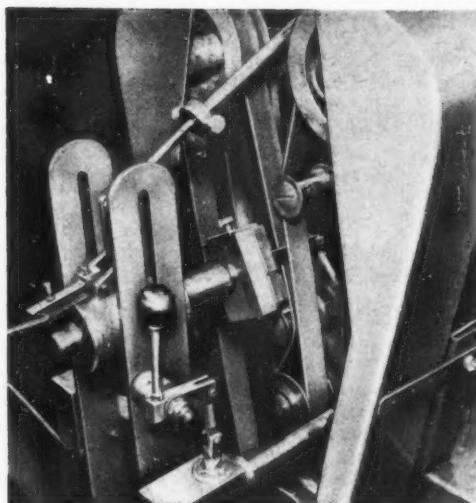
Close-up View of the Morris-Bristol Machine with the Blade, in its Holder, in Position Between the Belt Surfaces. The Blade is Rotated and Moved Horizontally for the Polishing Operation
